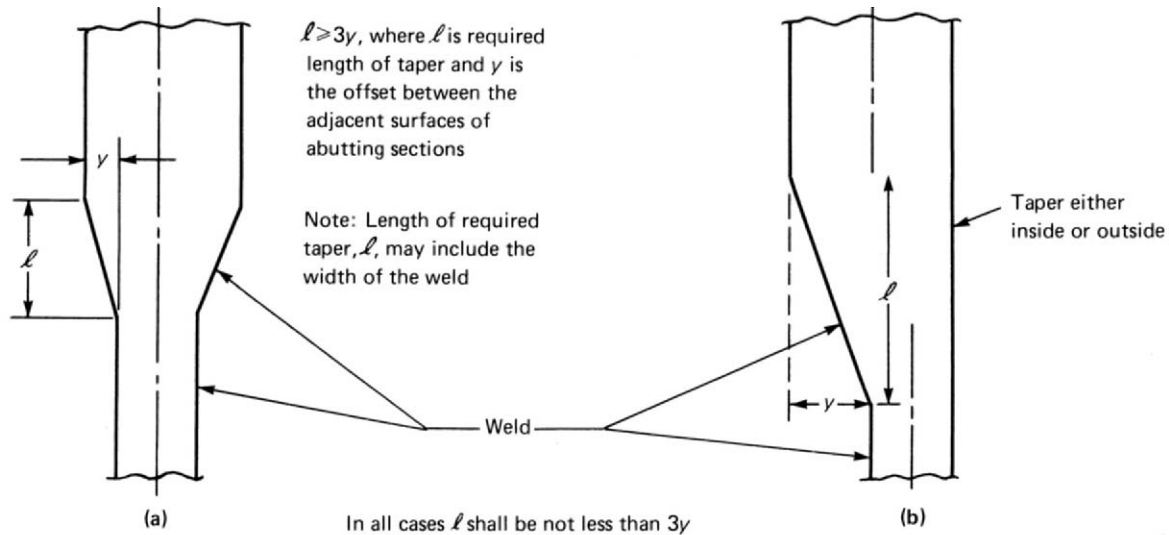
BUTT WELDING OF SECTIONS OF UNEQUAL THICKNESS
